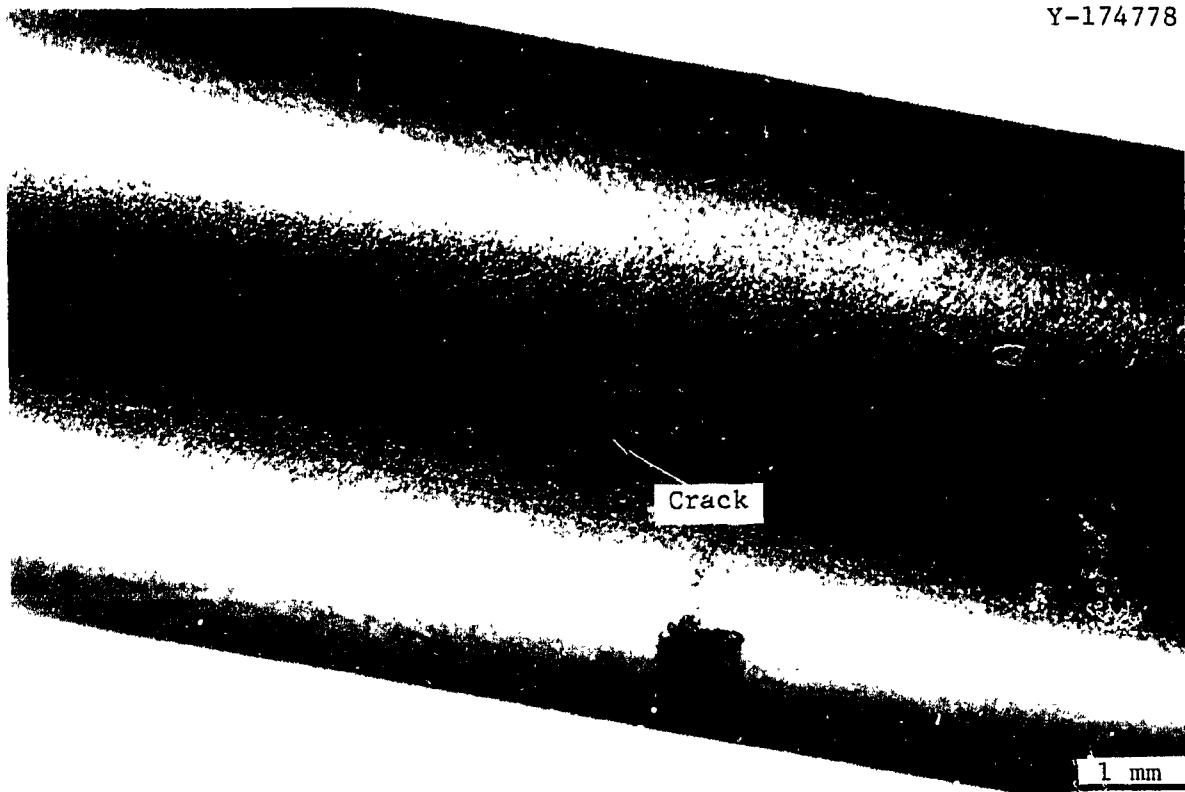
Surface view of crack detected in modified 9 Cr-1 Mo steel tube sample during ultrasonic inspection.
